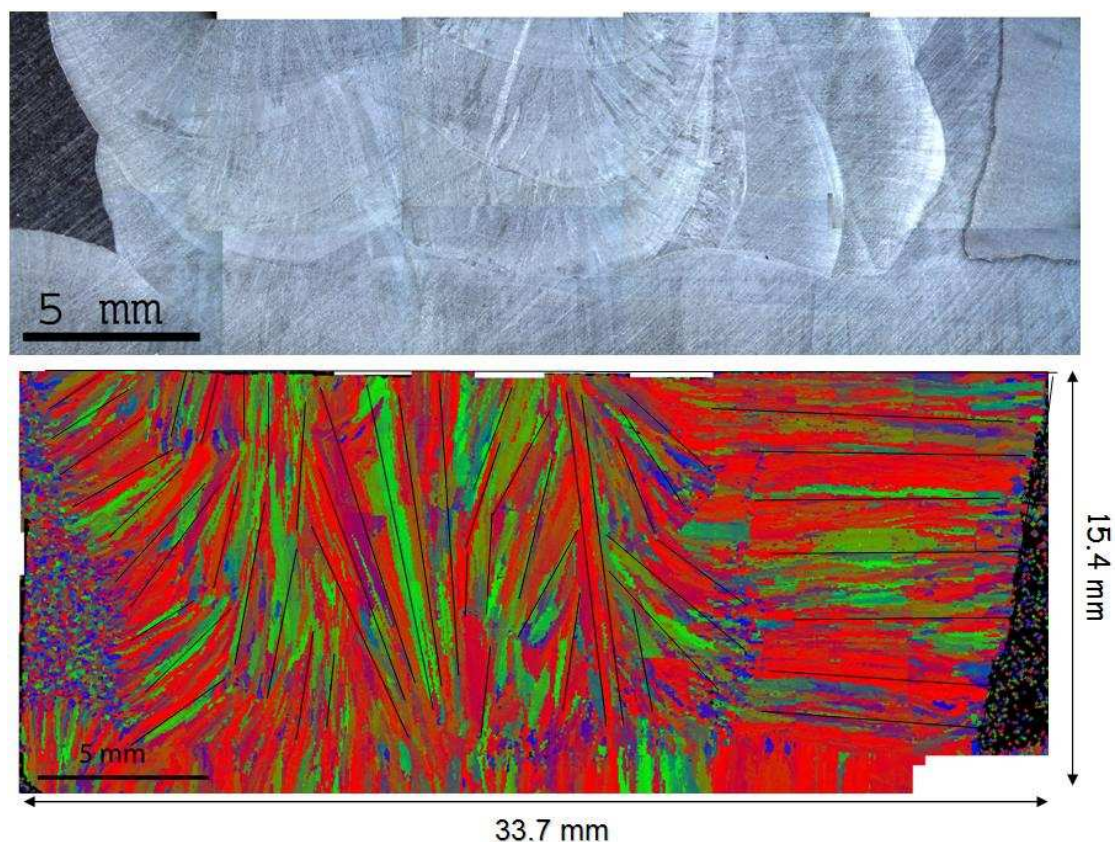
An austenitic weld showing the buttering and cladding layers, and the section zones for EBSD scanning.
